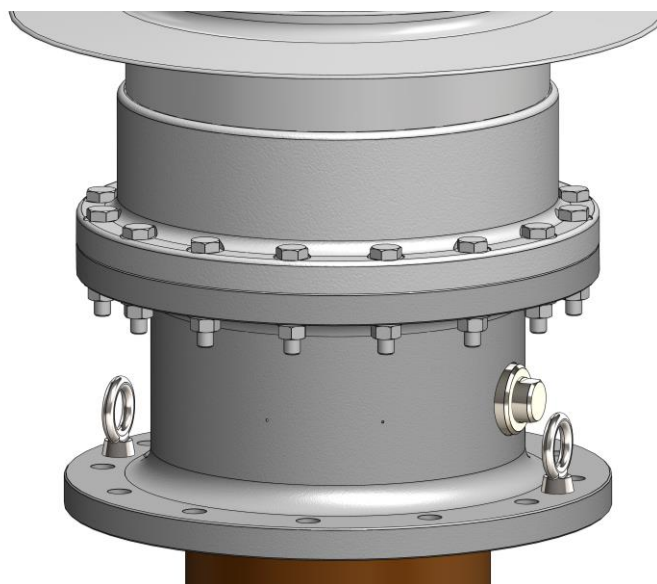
Fixing of Eyebolt on mounting flange (Eye bolts are not part of supply)
